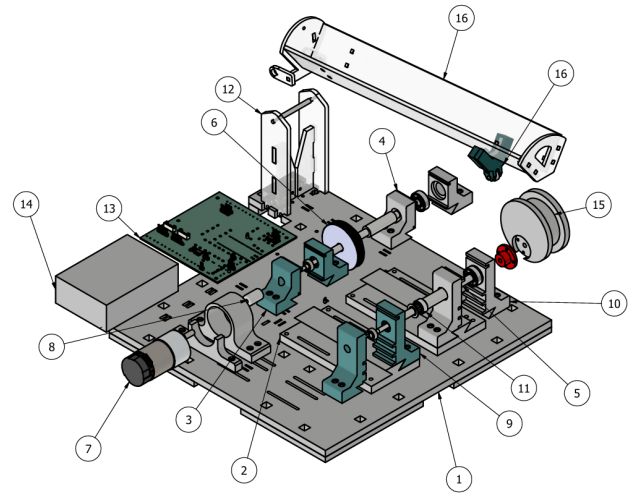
Exploded view of the proposed ball-and-beam platform.
